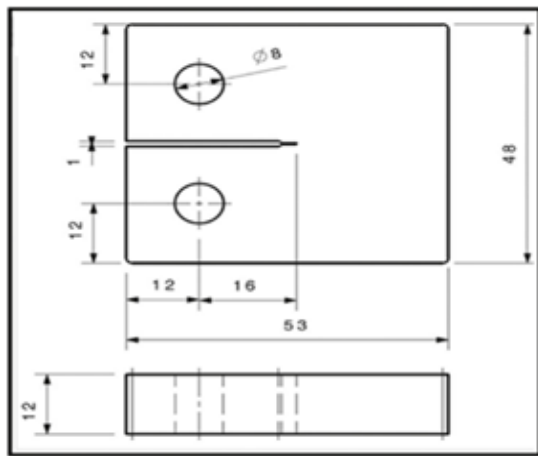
The dimensions of the test object refer to the ASTM D5405 standard.
